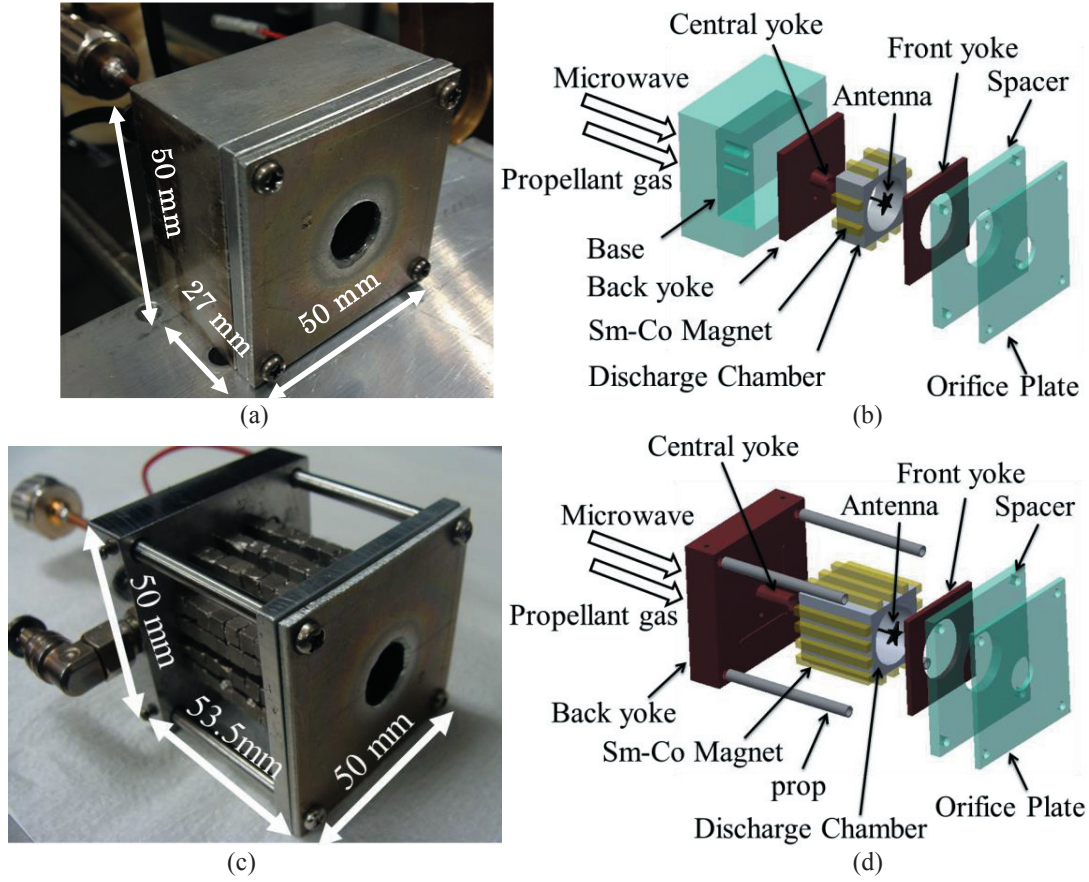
Appearance of the thruster, (a)photo of short type (b)parts assembly of short type,(c) photo of long type(parts assembly of the long type)
